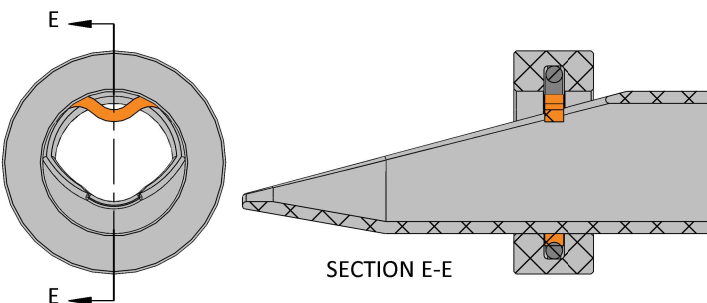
Continue pushing rod resizing tool. PTFE seal is almost resized into seal groove.
